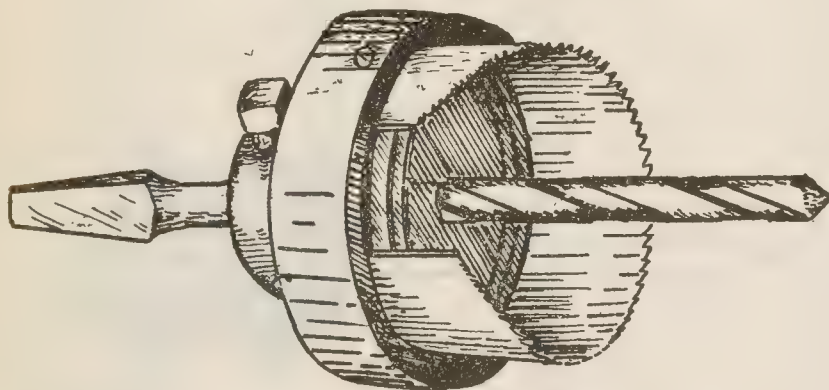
,031.—Combined drill and circular hack saw for making special tappings in storage tanks.
